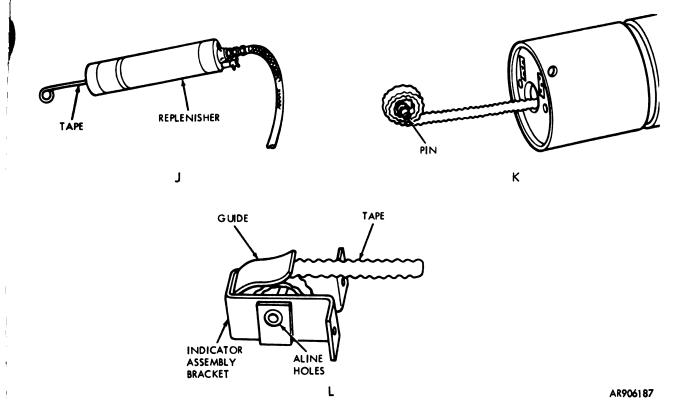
Replenisher disassembly or assembly (3 of 3).
